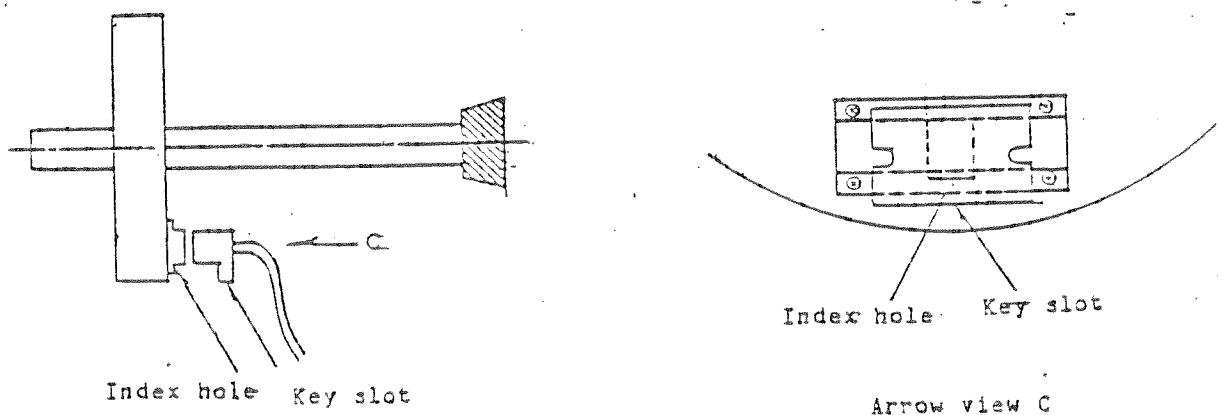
Mounting onto a flat surface on the load side of the rotating body
